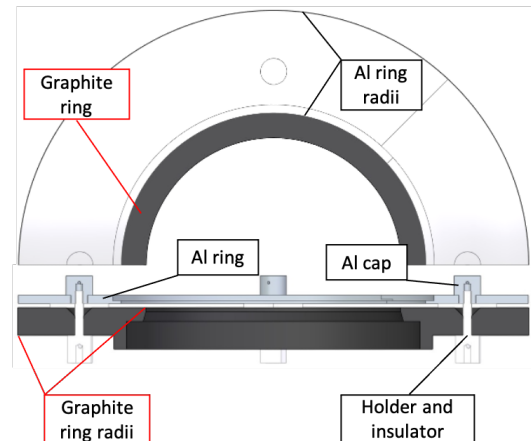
Top view (top) and side view (bottom) showing details of the two-ring structure. The drawing displays a cut of the system.
